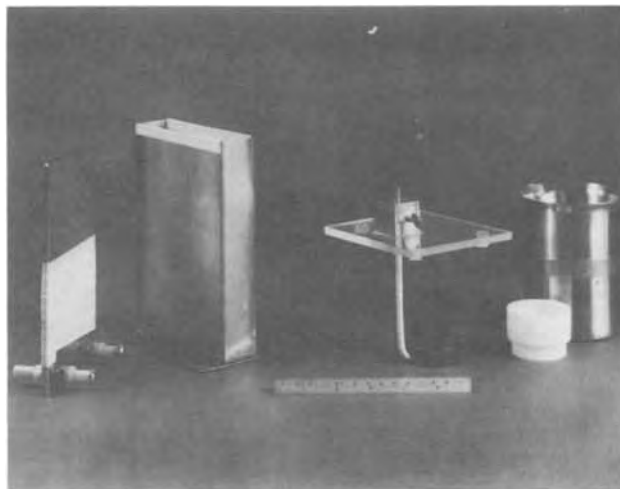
Apparatus for forming disks and pocket-shaped pieces
